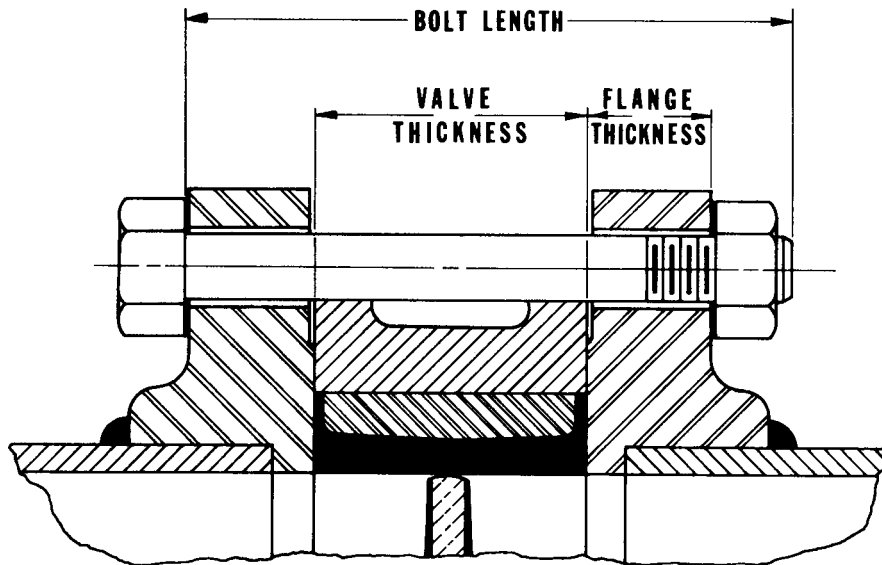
Butterfly Valve Bolt Assembly with 150-psi Steel or Bronze Flanges
